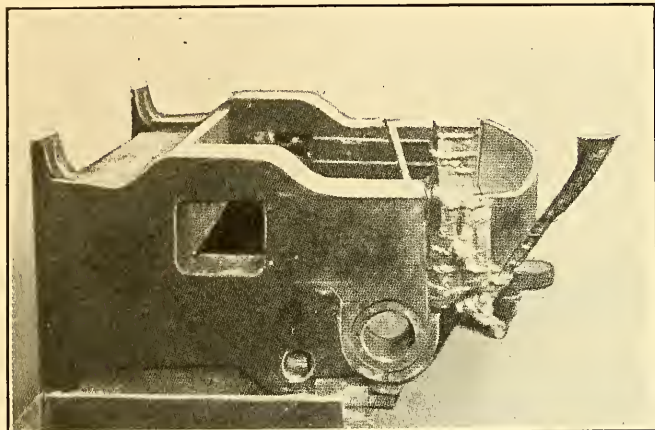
Cast-Iron Housing of Knuckle Machine, Welded by the Standard Parts Co., Cleveland, Ohio.
